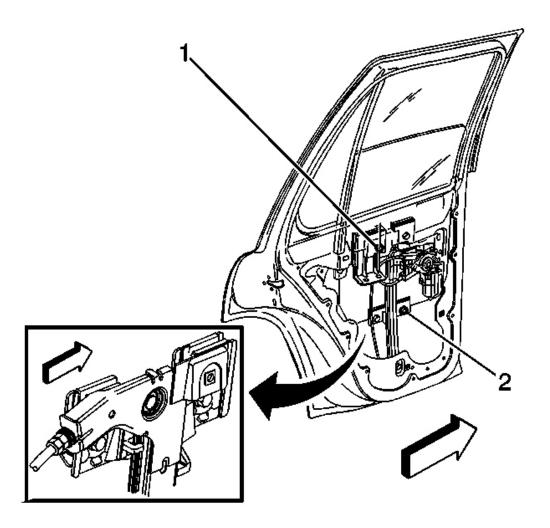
View Of Regulator In Remove/Load Position & Window Fully Secure Position (Rear Door) Courtesy of GENERAL MOTORS CORP.
